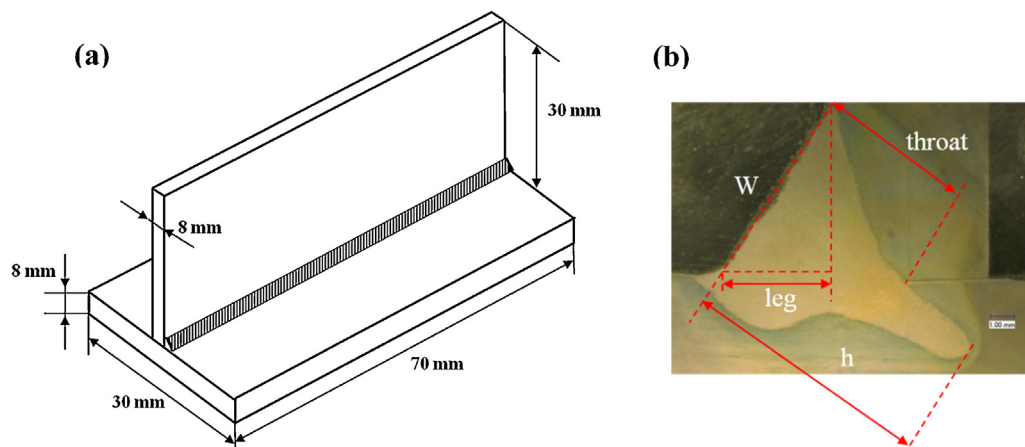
(a) Geometry and size of the T-joint configuration; (b) schematic diagram of parts of a fillet weld.
